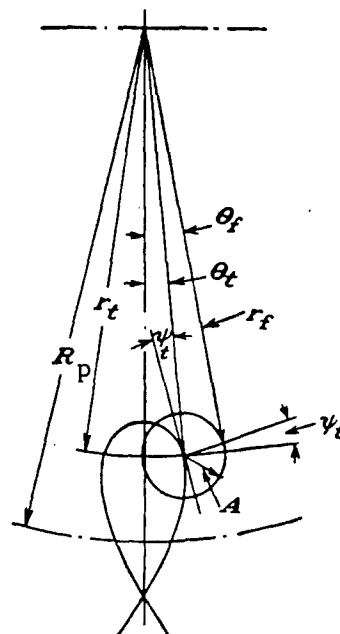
Fillet Form of Rounded Corner of Hob Tooth (symbols explained in text) (4)
